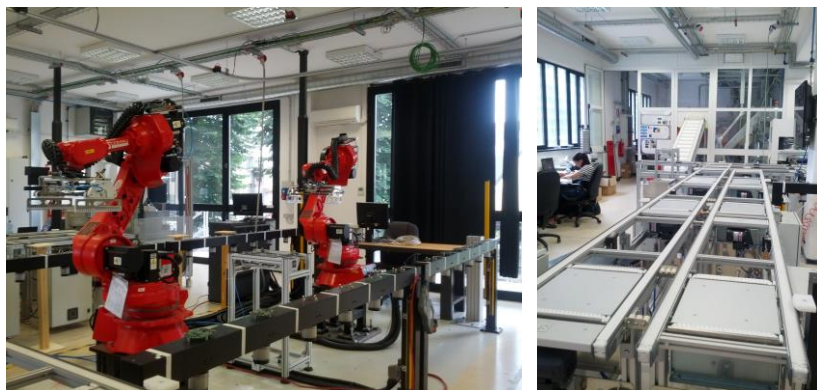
Photographs of Cell 1 for the automatic disassembly and handling of PCBs at ITIA CNR.
